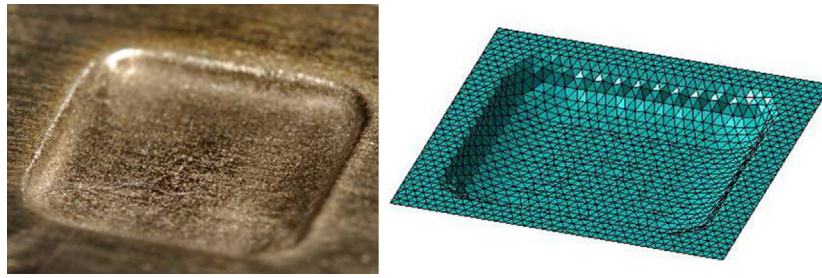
Pocket machined by a cylindrical tool and predicted by the BEM.
